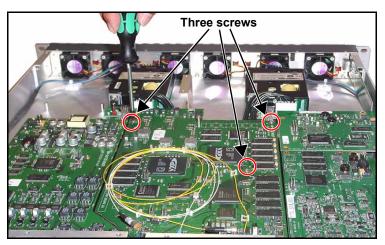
Removing HDTV Board Mounting Screws (X75OPT-HDUPG Module Shown)
